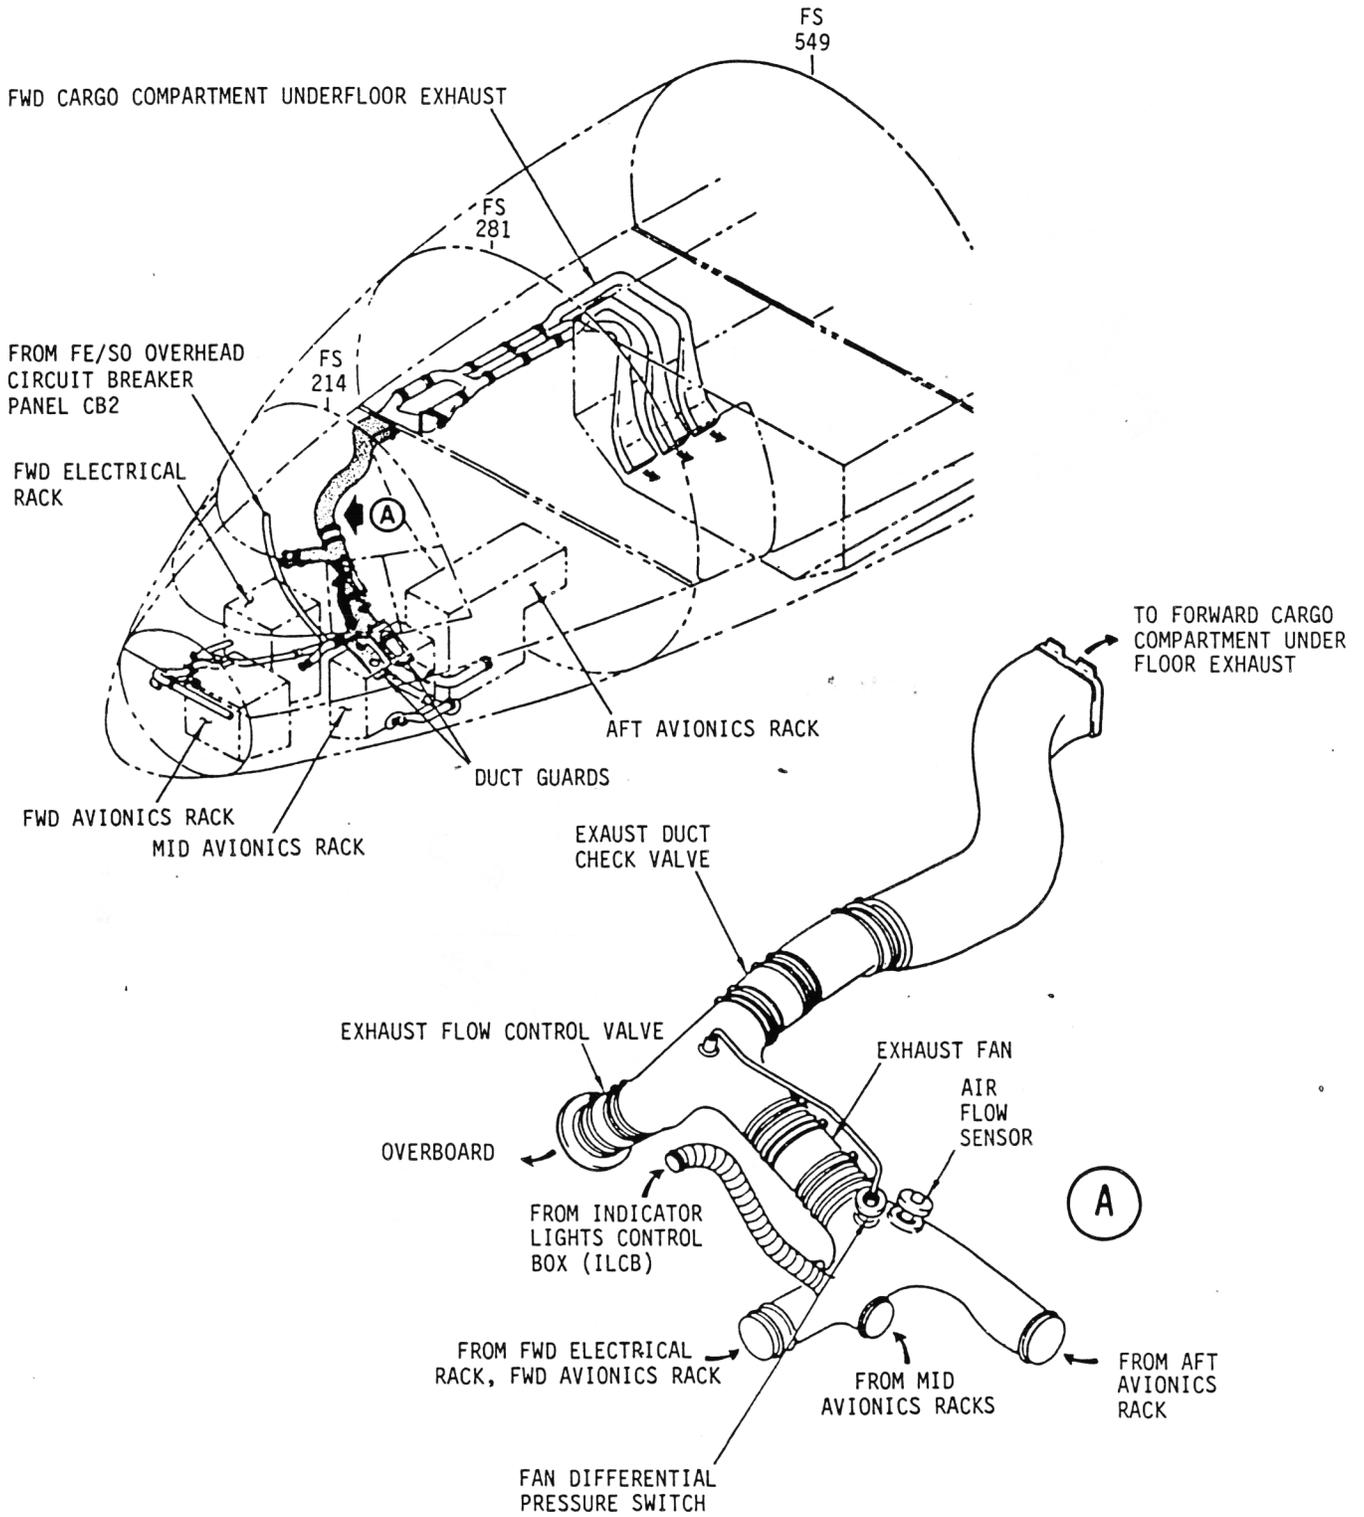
LOCKHEED L-1011 FORWARD EQUIPMENT COOLING SYSTEM
